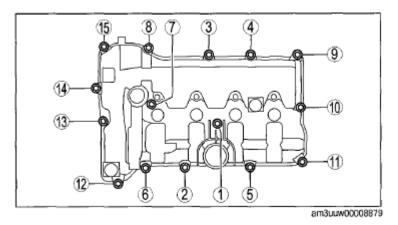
Identifying Cylinder Head Cover Bolt Tightening Sequence
